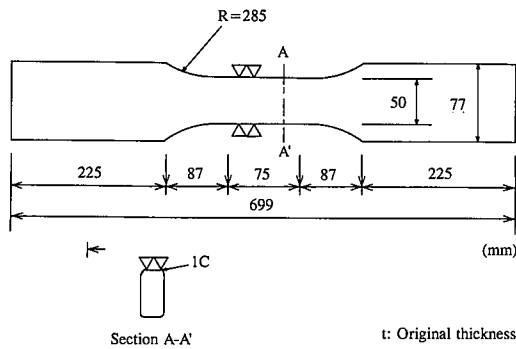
Shape and dimensions of base-metal fatigue test specimen
